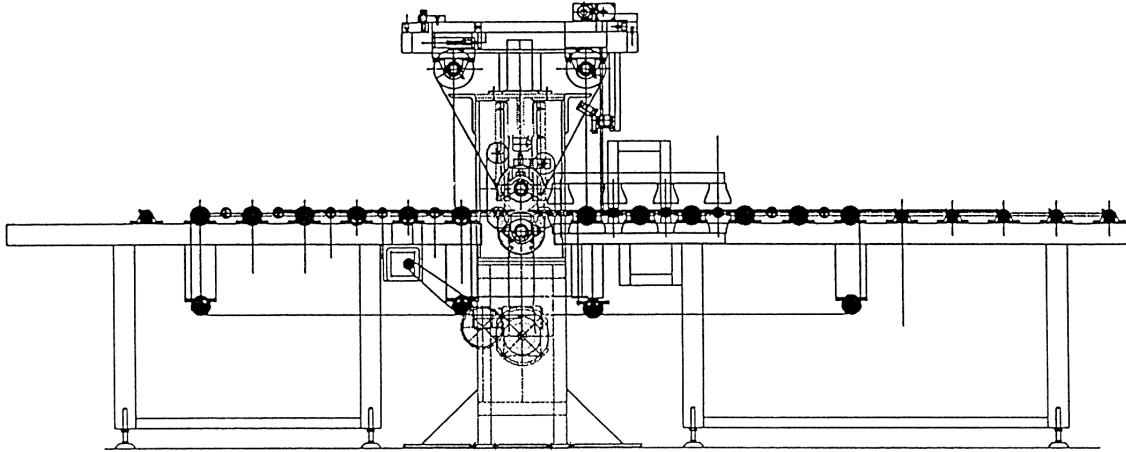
Drawing of the Prototype Continuous Lamination Equipment
